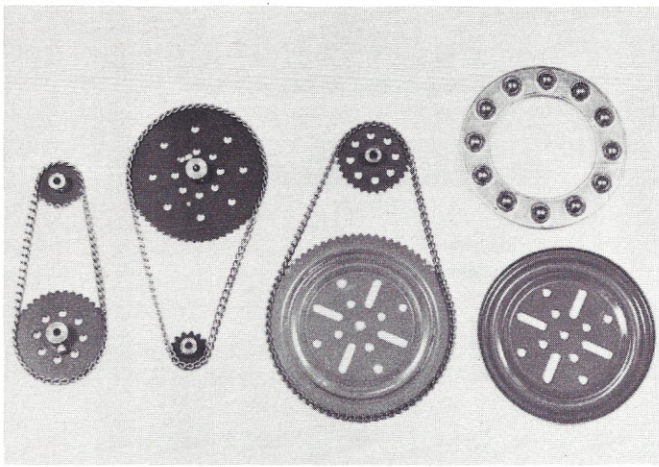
The range of sprocket wheels in the Meccano system, namely $\frac{3}{4}$ in., 1 in., $1\frac{1}{2}$ in., 2 in., 3 in., and 4 in. diameter. The largest sprocket wheel has a flange for use with a ball cage. The smooth-edged race is also shown; this part is used in the model Rhino to provide a low-friction rotational bearing for the main mechanism housing.
